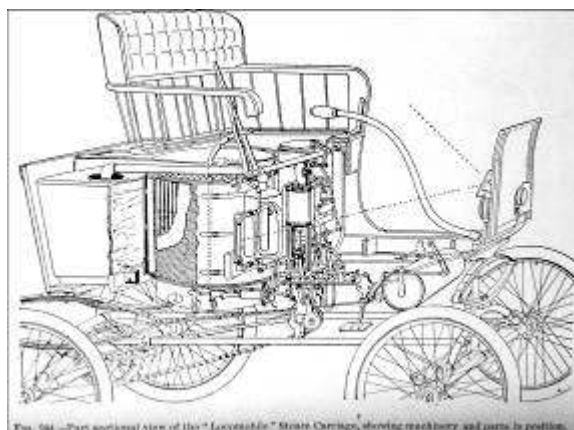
Part side view of the "Locomobile" Street Carriage, showing machinery and parts in position.
